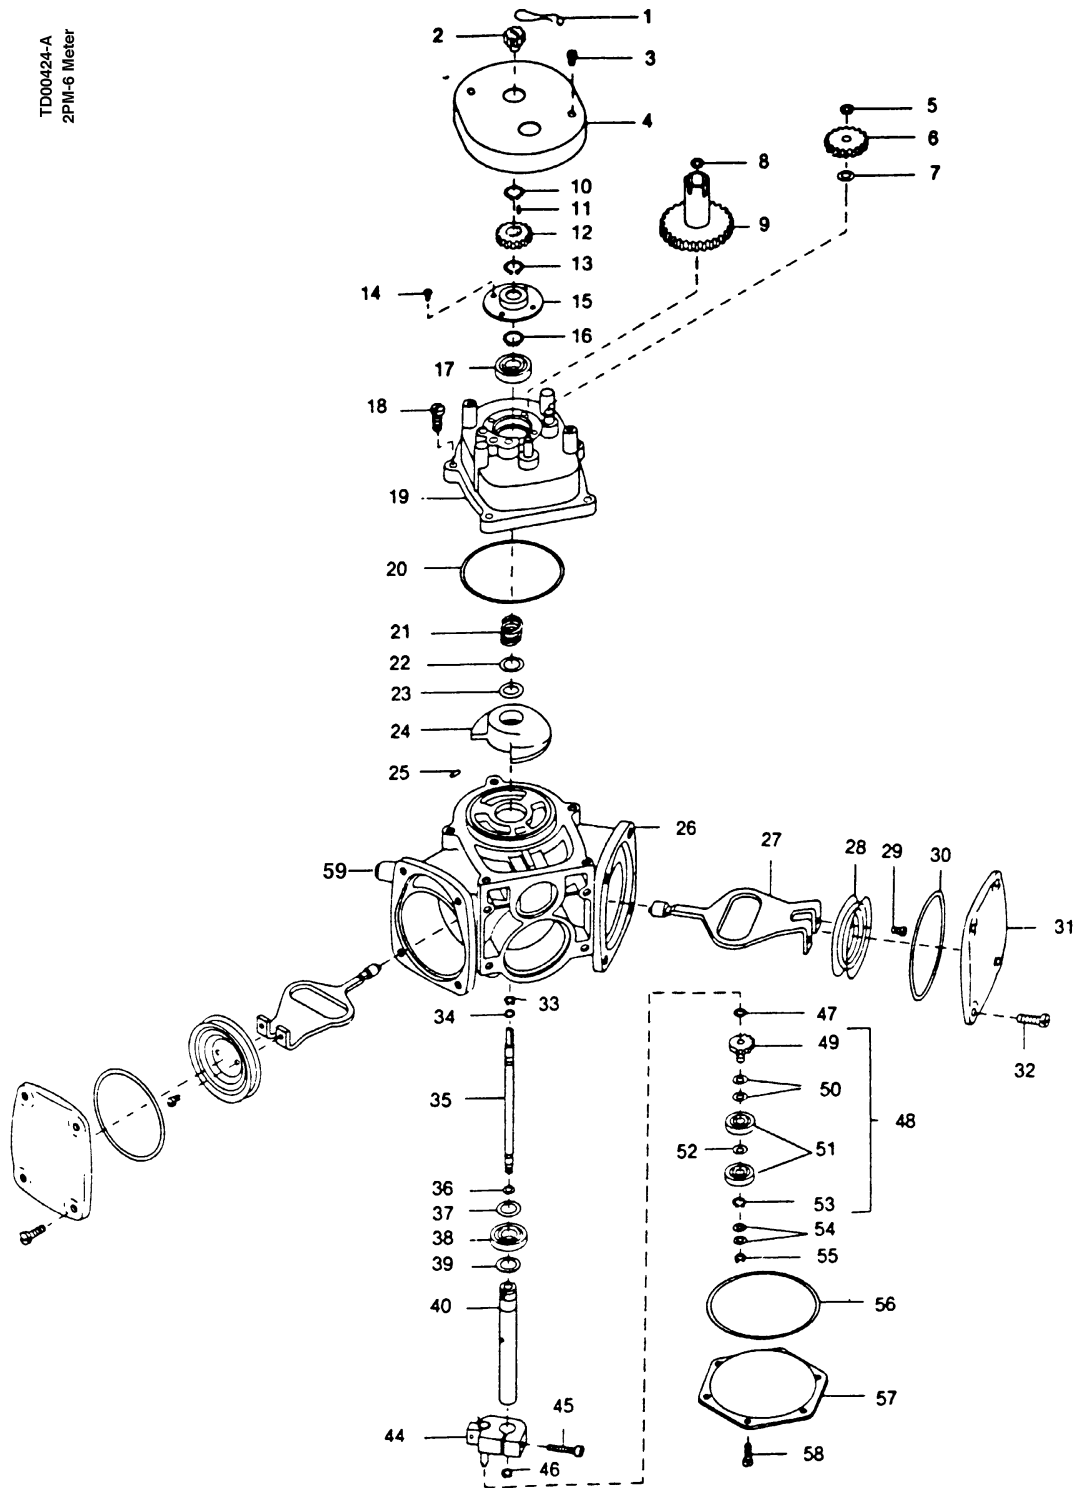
2PM-6 SERIES METER ASSEMBLY
